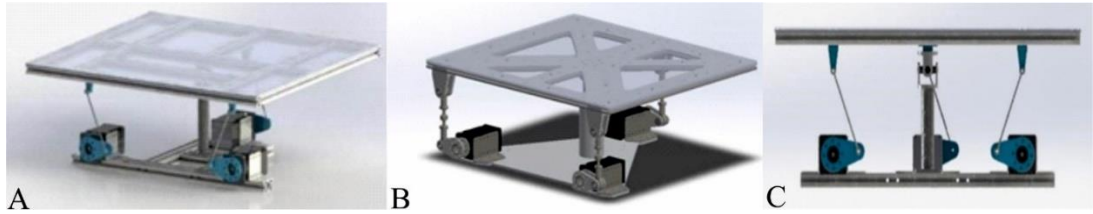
(a) pre-prototype, (b) ultimate prototype, (c) test prototype front view
